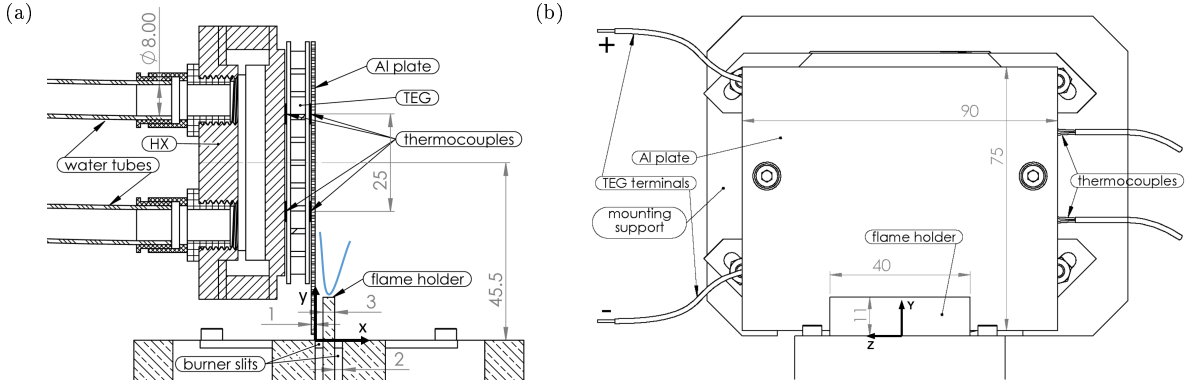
Details and dimensions of burner, TEG and Al plate (units in mm), with (a) front and (b) side views; XYZ cartesian coordinate system considered for experimental results.
